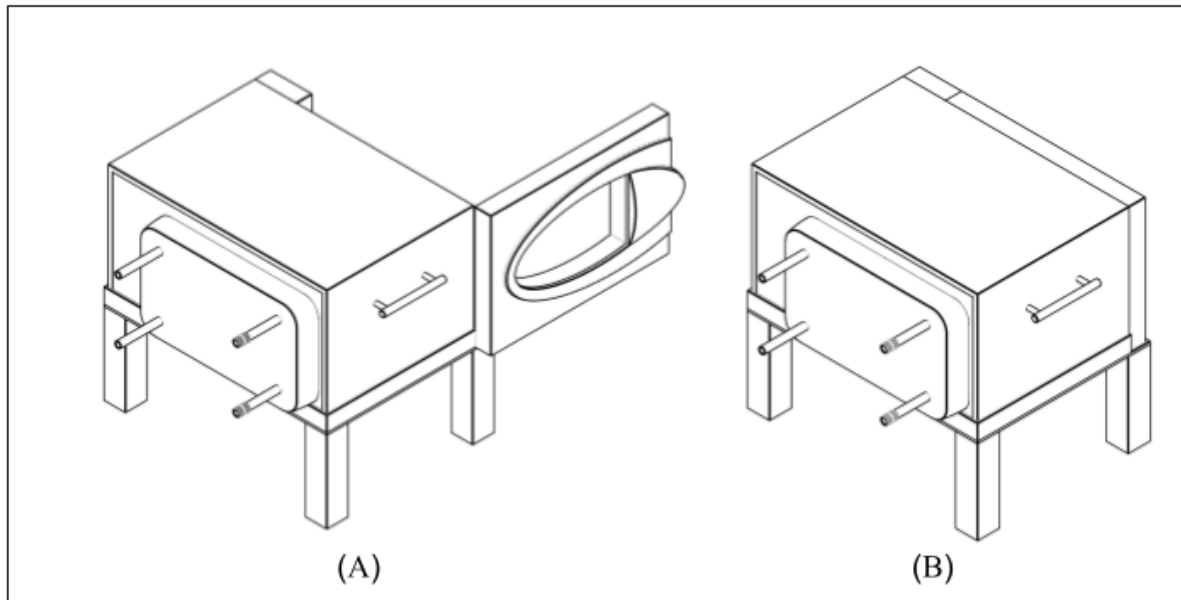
(A) Open Dryer Rear Isometric View, (B) Closed Dryer Rear Isometric View
